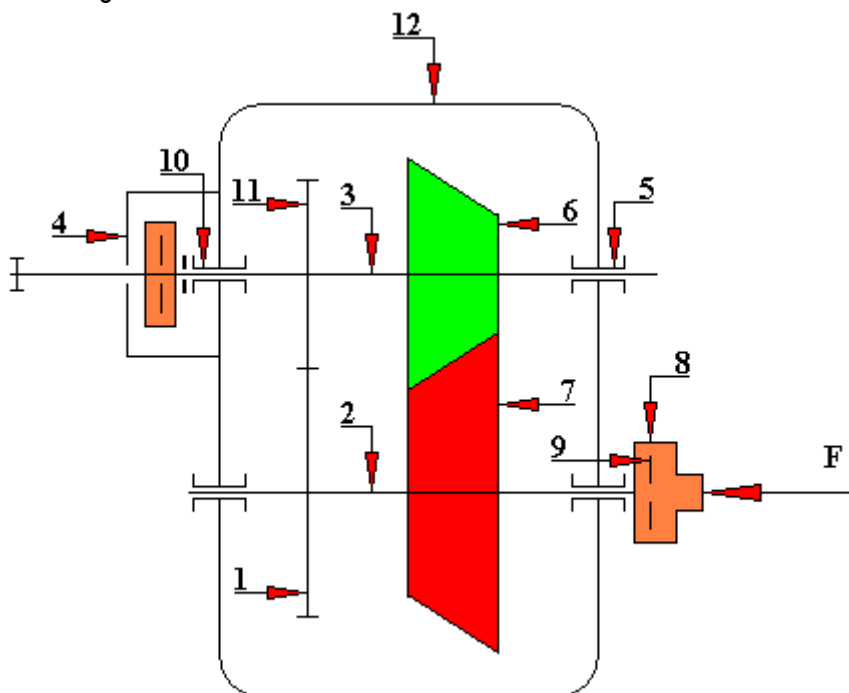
A diagram of a conical roller test rig designed for testing pitting [45]
